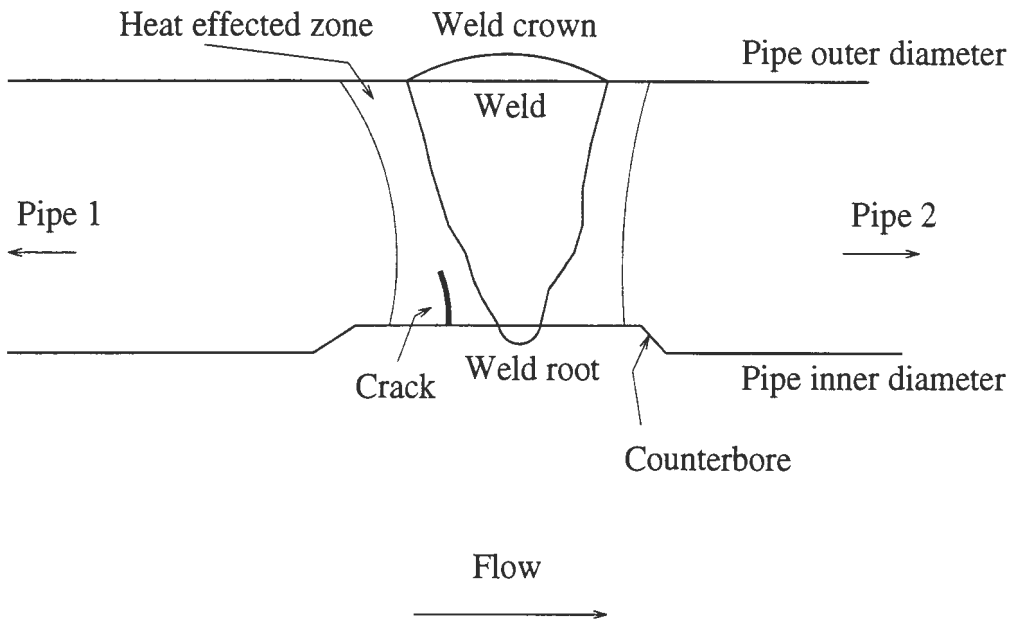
Typical nuclear pipe and weld geometry
